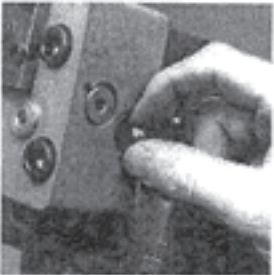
Install Servo Pressure Shuttle Ball Valve
